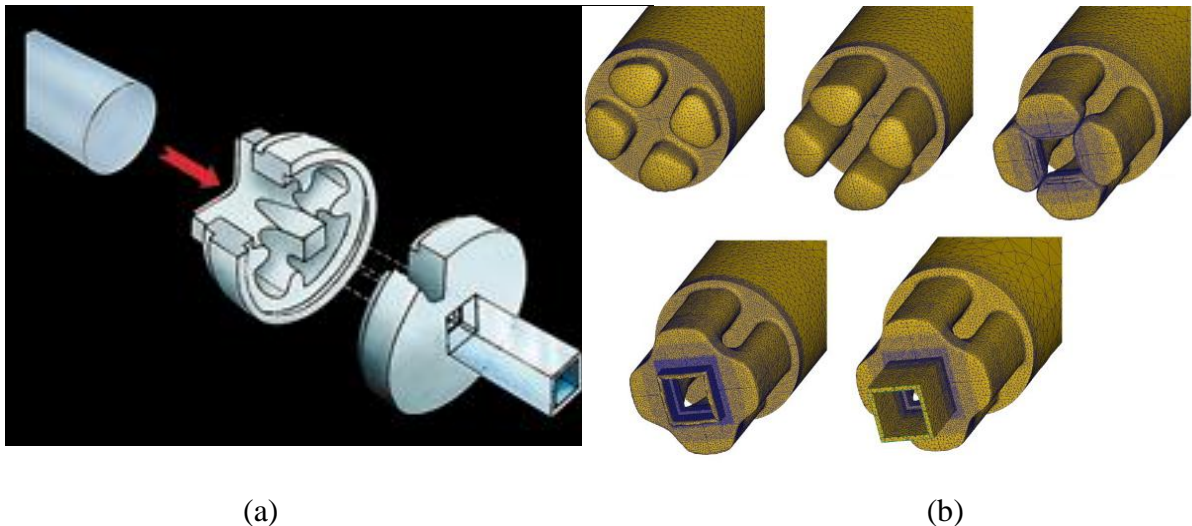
Layouts of extrusion dies (a) and the material flow of billets in the extrusion die (b)
